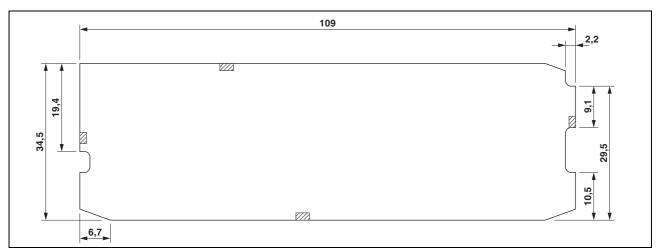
Maximum dimensions of the horizontal PCB of the 37.5 lower housing part
